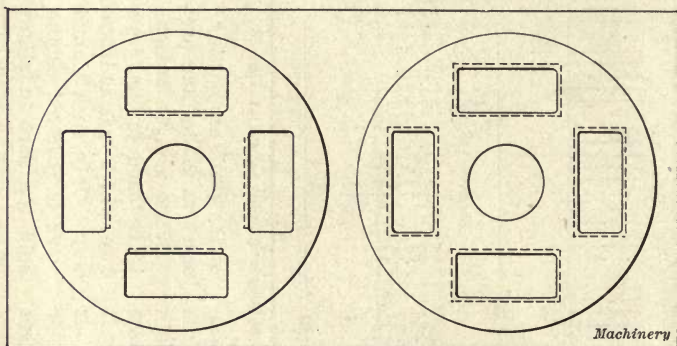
Plan View showing Four Rectangular Holes which are Finished by Broaching in Two Operations
